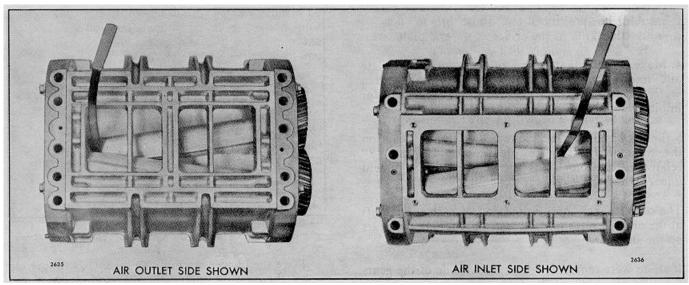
Measuring "CC" and "CC" Clearance Between Blower Rotor Lobes
